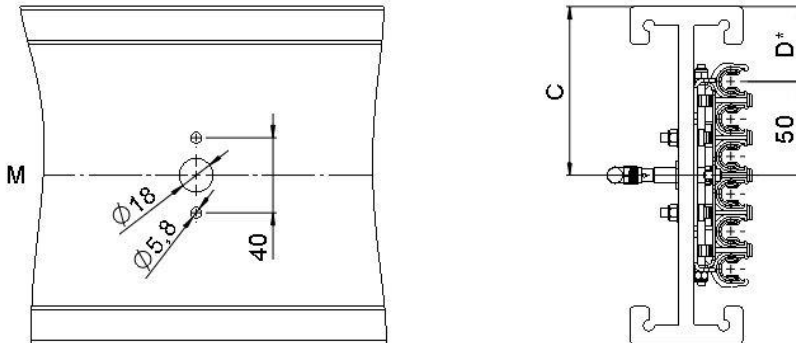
Example: Bore hole pattern sliding contact sensor unit (6-poles)
